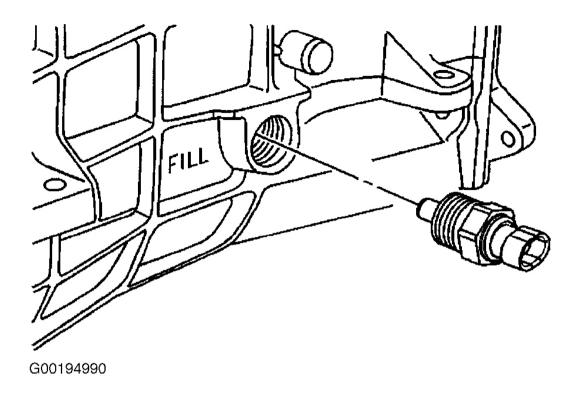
Locating Transmission Fill Hole (With TFT Sensor) Courtesy of GENERAL MOTORS CORP.
